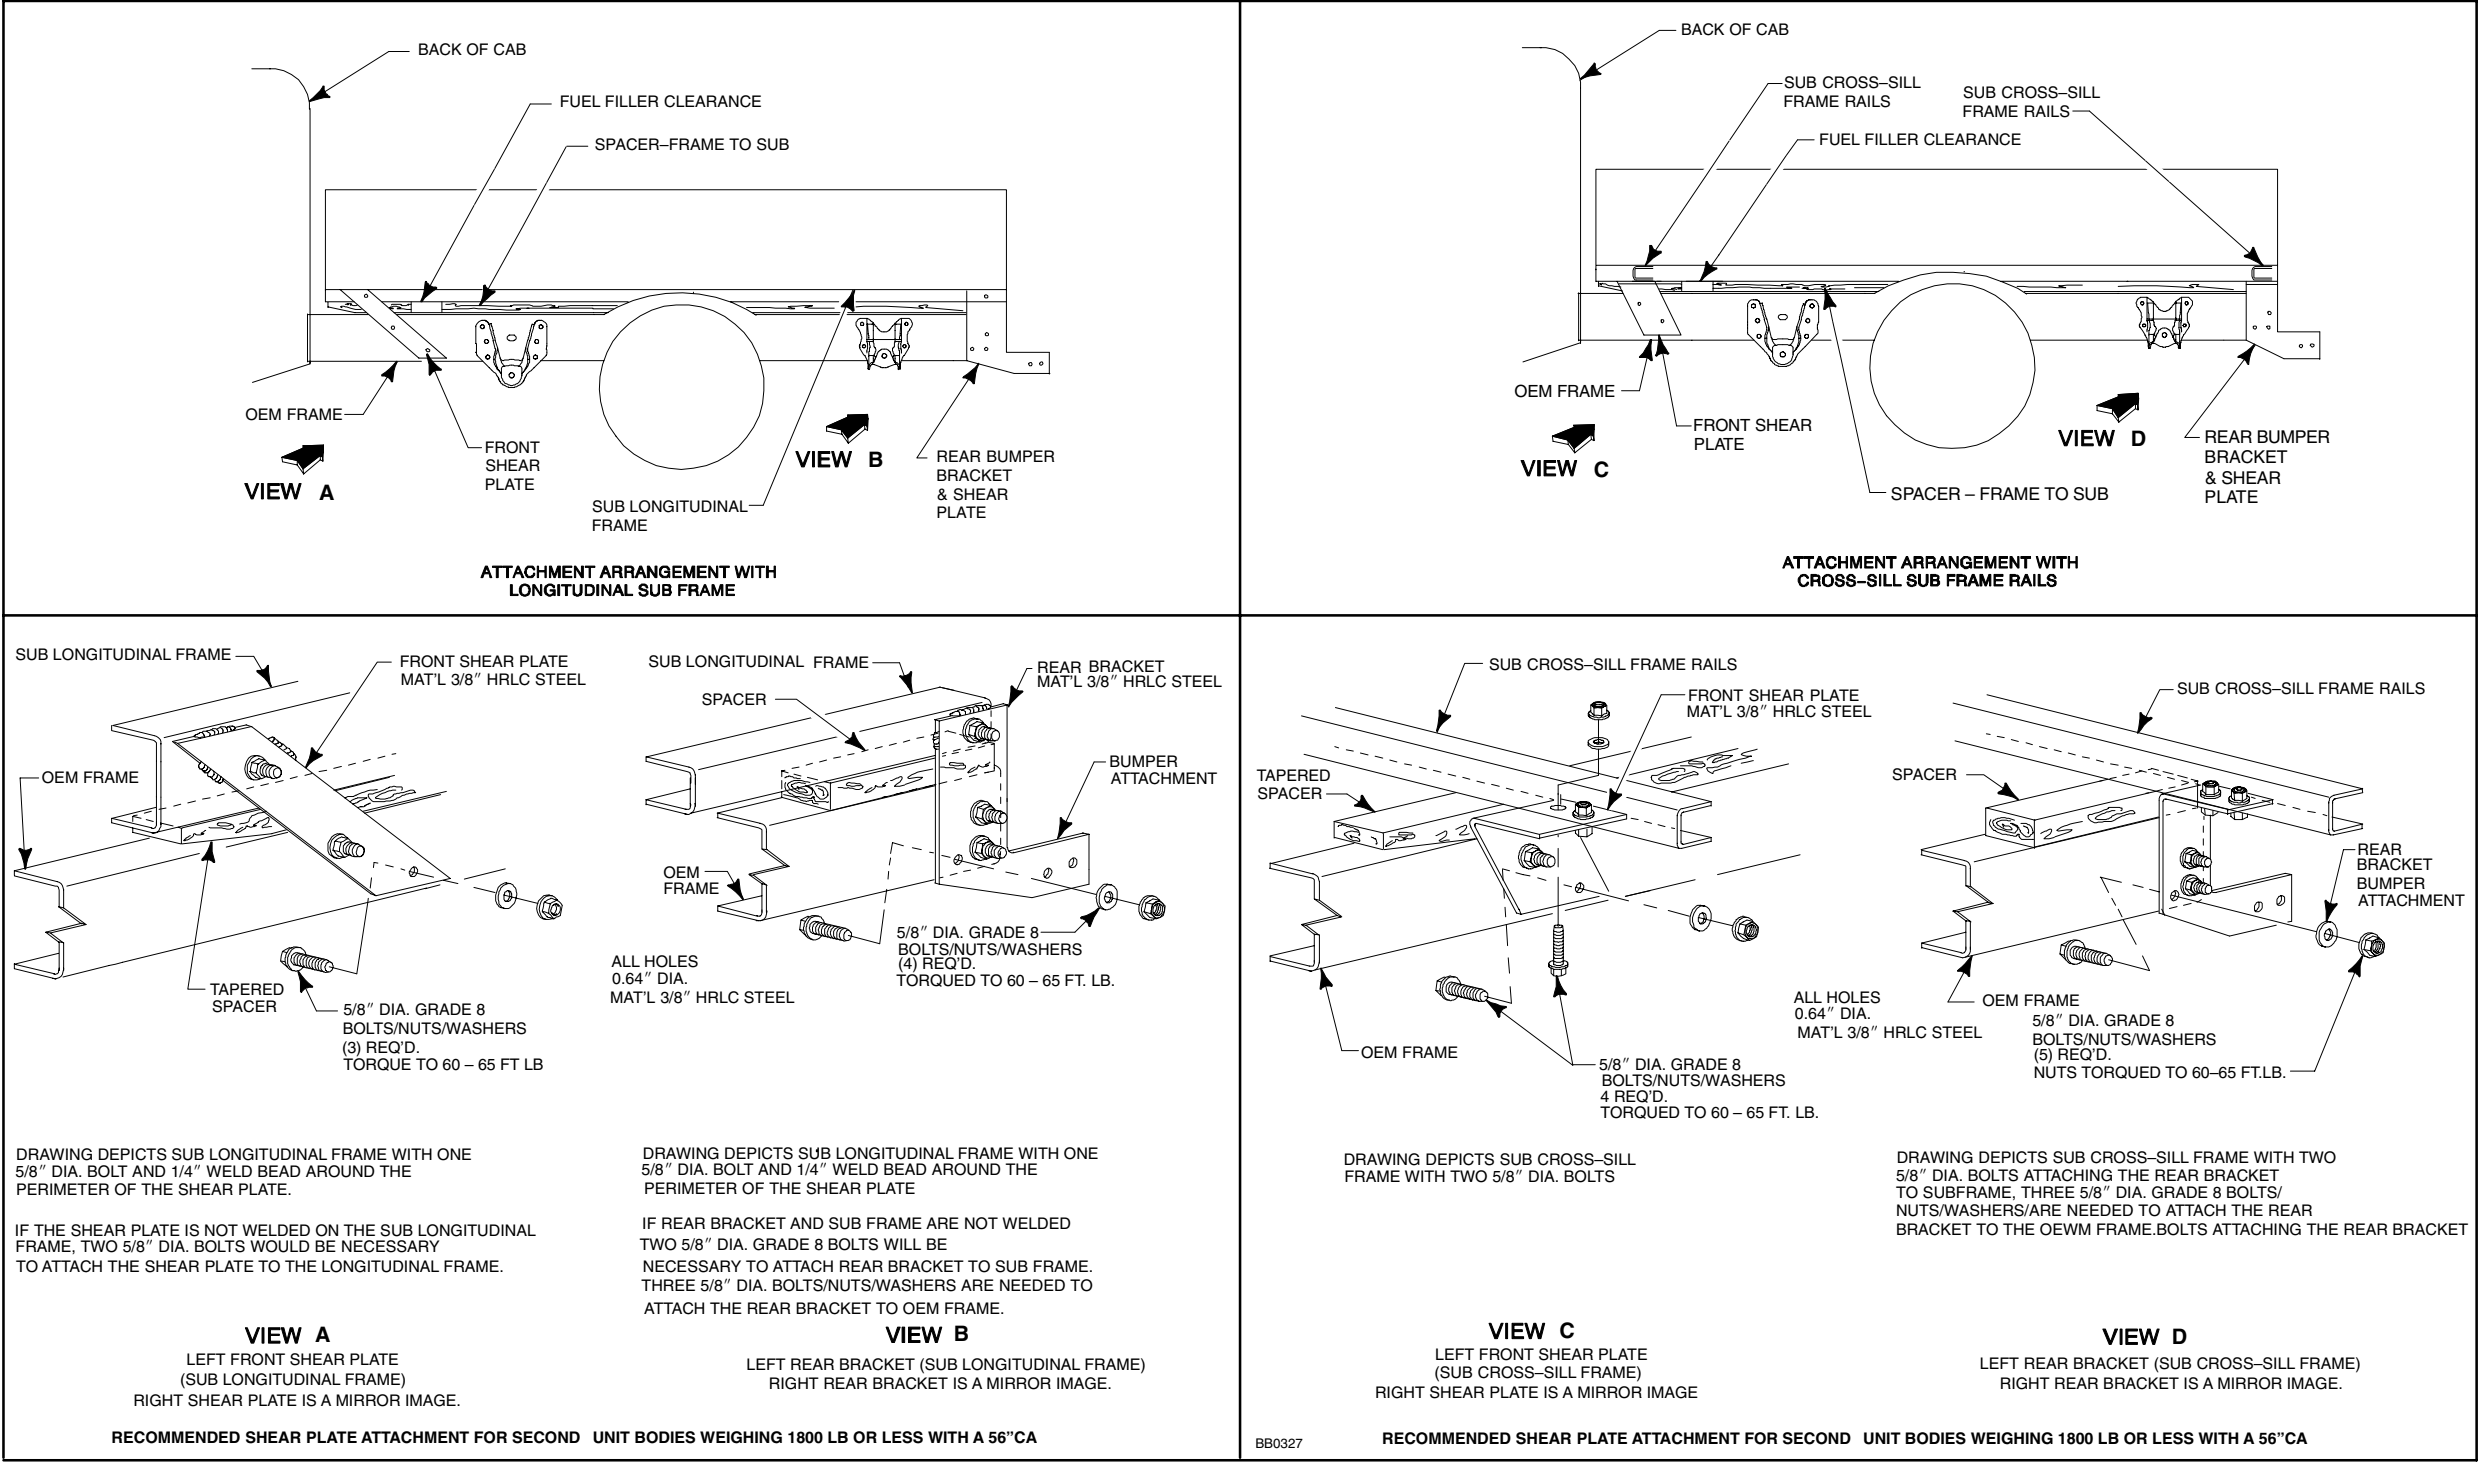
FIGURE A - SUPER DUTY F-SERIES SUB MOUNTING TECHNIQUE #1
